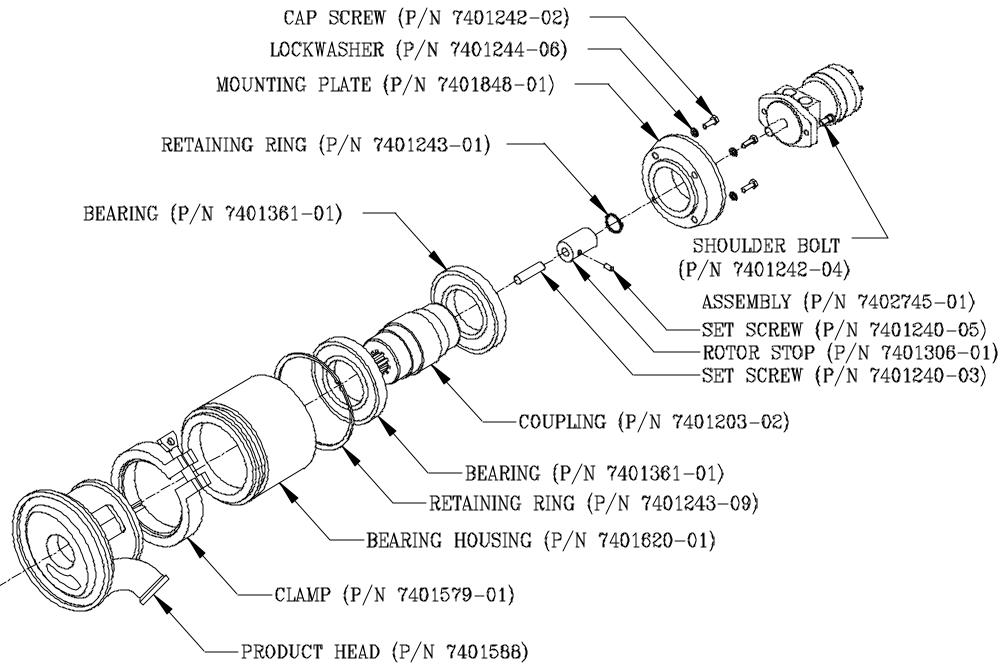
Upper Bearings, Hydraulic Drive Motor With Rotor Stop
